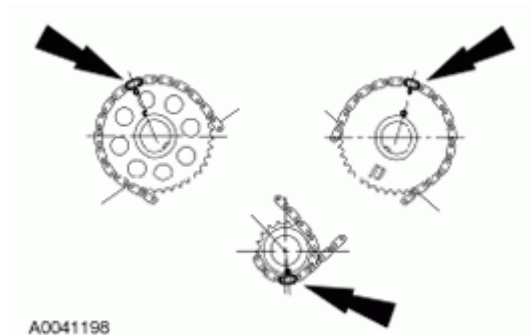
Identifying Colored (Marked) Chain Links Are Lined Up With The Dots On Crankshaft Sprocket And Camshaft Sprockets
